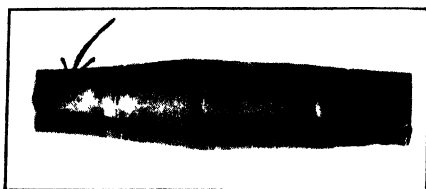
Fractured nitrided fatigue specimen. The arrow shows the apparent flaking, which is really due to tearing of the case after the core had cracked.
